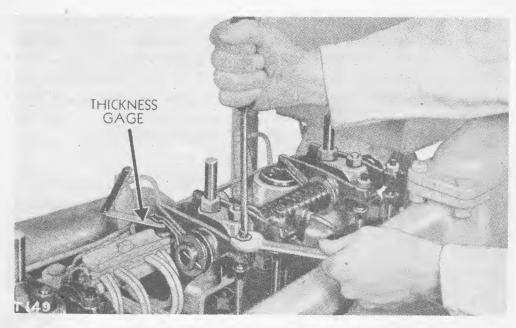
Adjusting Inlet and Exhaust Valve Clearance
